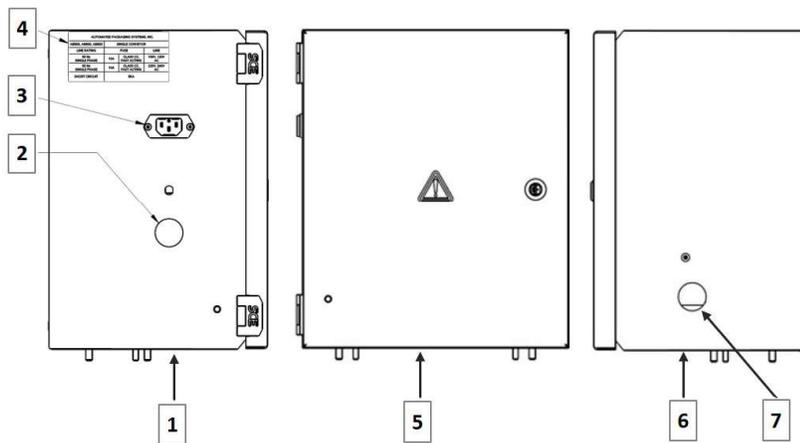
CONVEYOR MOTORENCLOSURE
